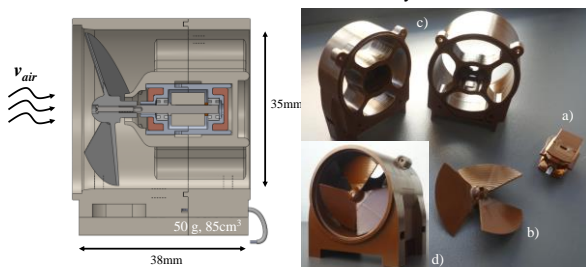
Cross-sectional view of our harvester and a) to c) main parts and d) photograph of the final harvester
